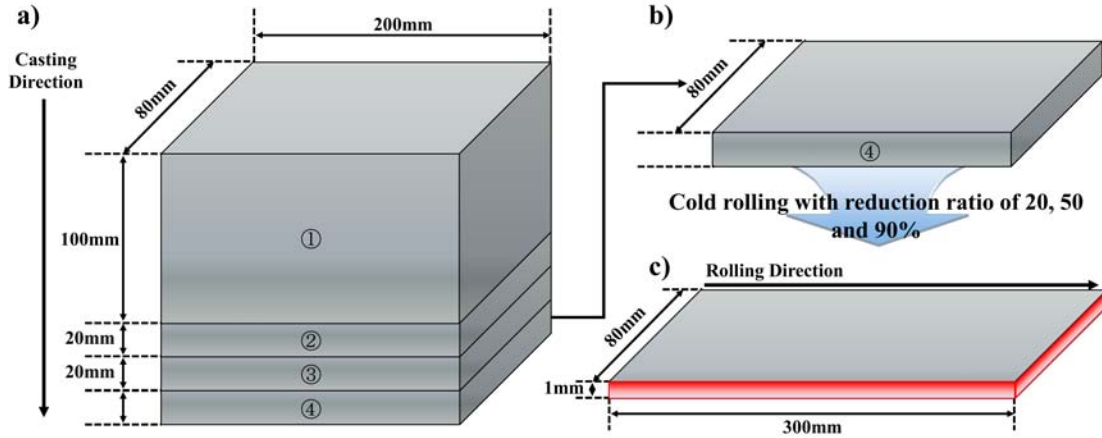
(a) Schematic diagram of DC casting direction and dimensions, (b) positions of a sample taken from the ingots for a test, and (c) dimensions of cold-rolled sheets
